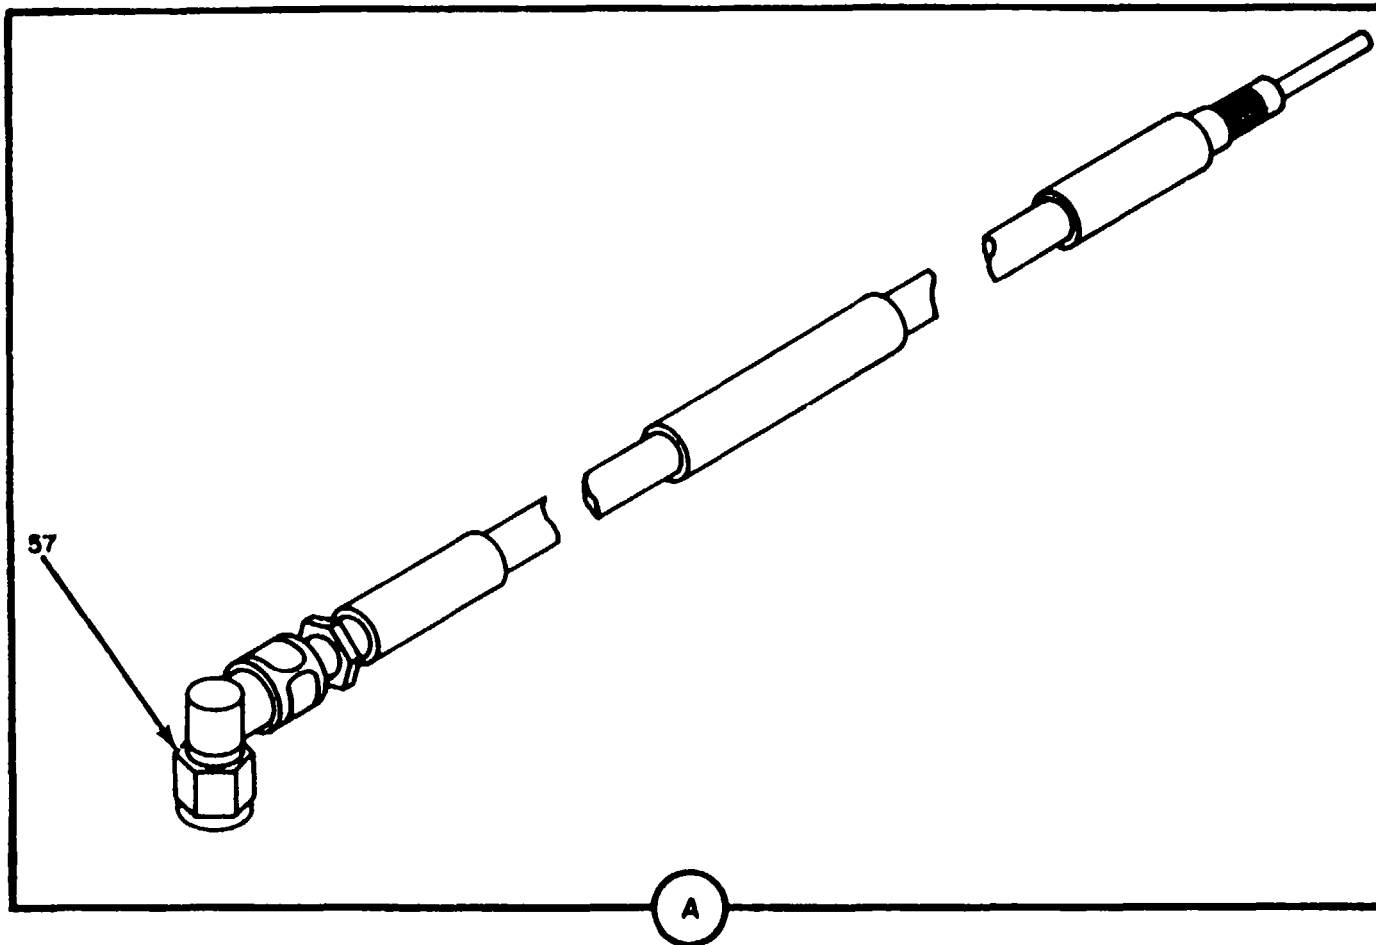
APC/Monitor Assembly (Sheet 4 of 4).
